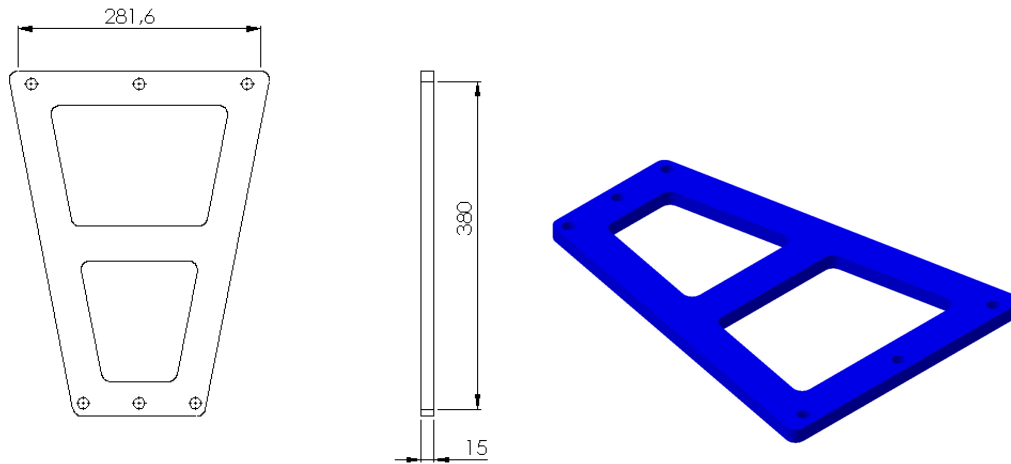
Design drawing and 3D view of the arms to hold the cover at the external structure.
